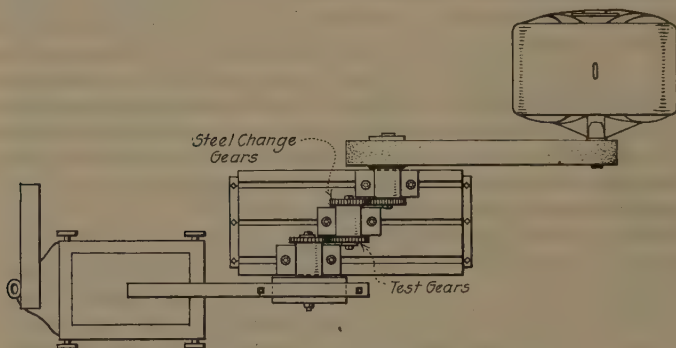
PLAN OF GEAR-TESTING APPARATUS
